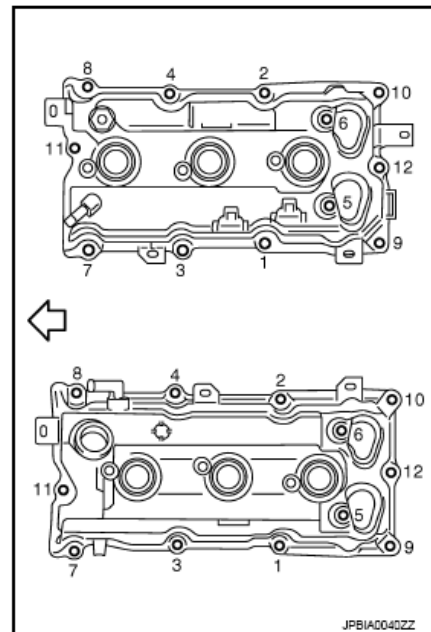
Identifying Rocker Cover Mounting Bolts Tightening Sequence
